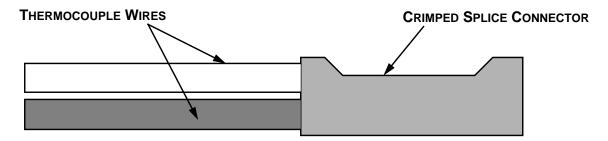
CRIMPED THERMOCOUPLE ENDS
